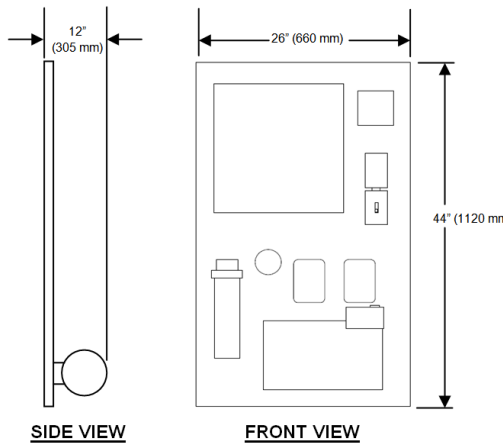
Dimensions – STANDPIPE-PAC™ Unit
